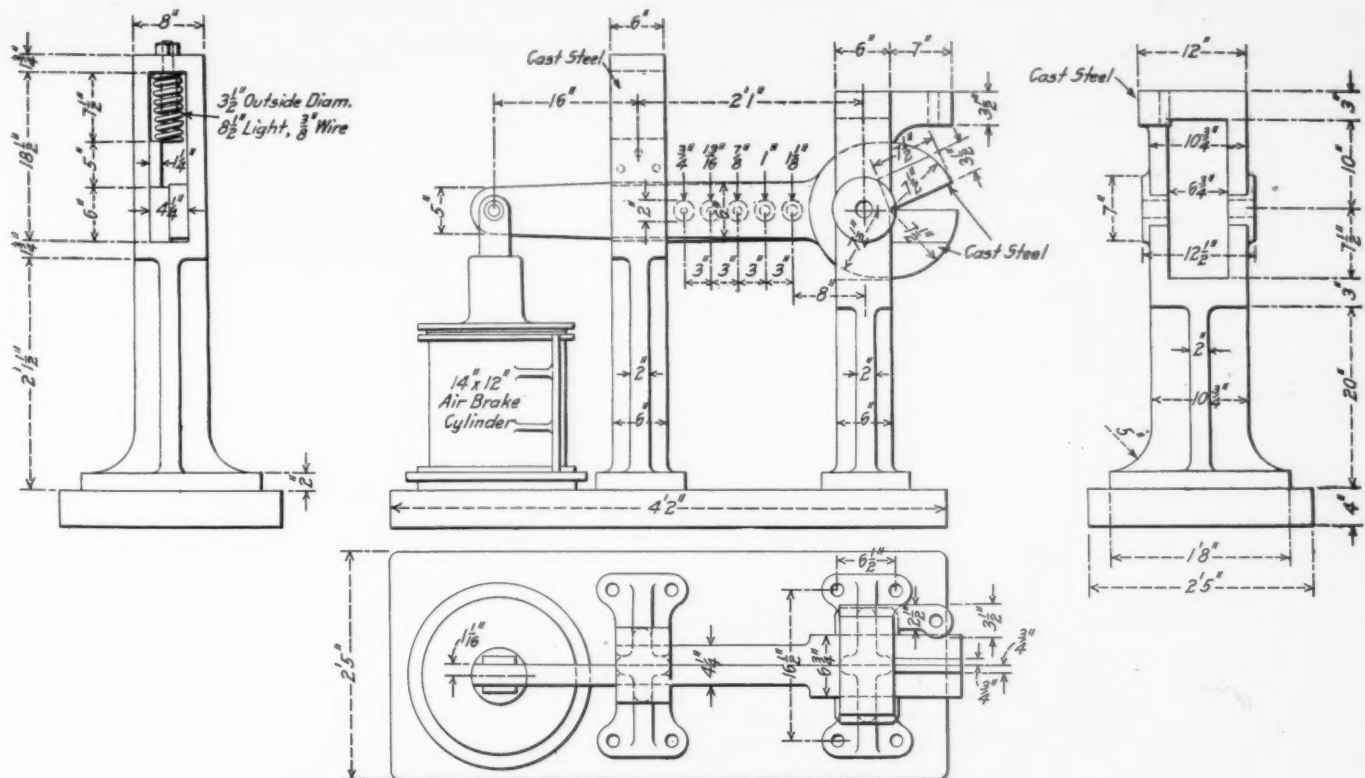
Details of Pneumatic Shears for Cutting Studs and Bolts.
